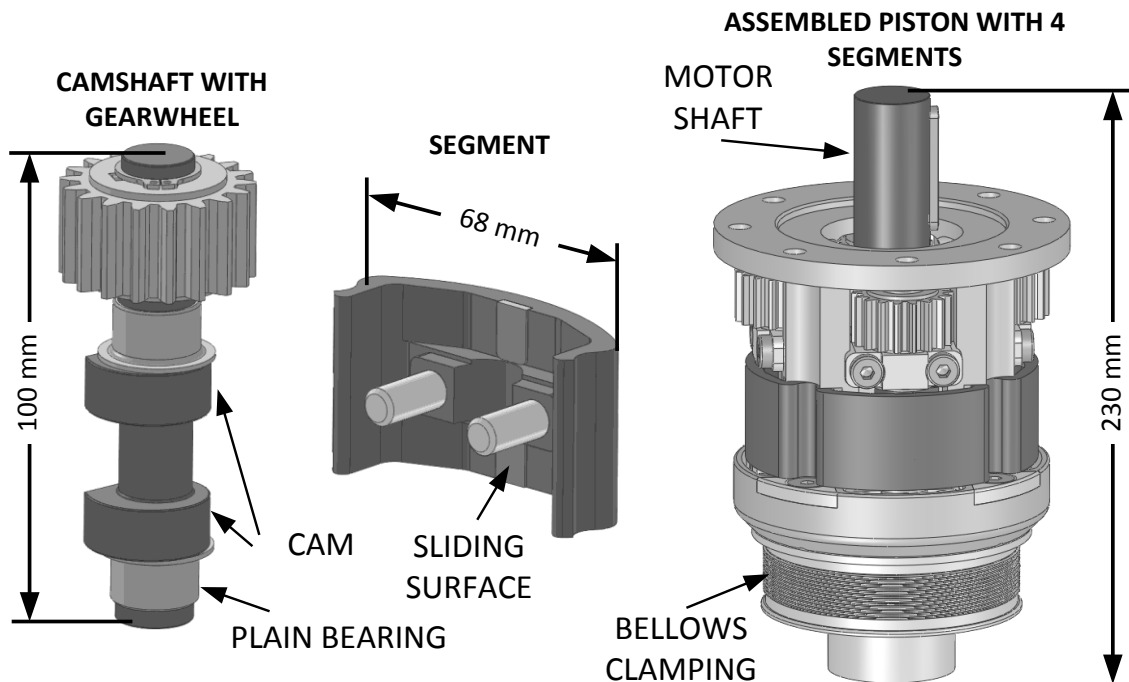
Gearwheel driven camshaft (left), piston segment (middle) and complete assembled piston with four implemented piston segments.
